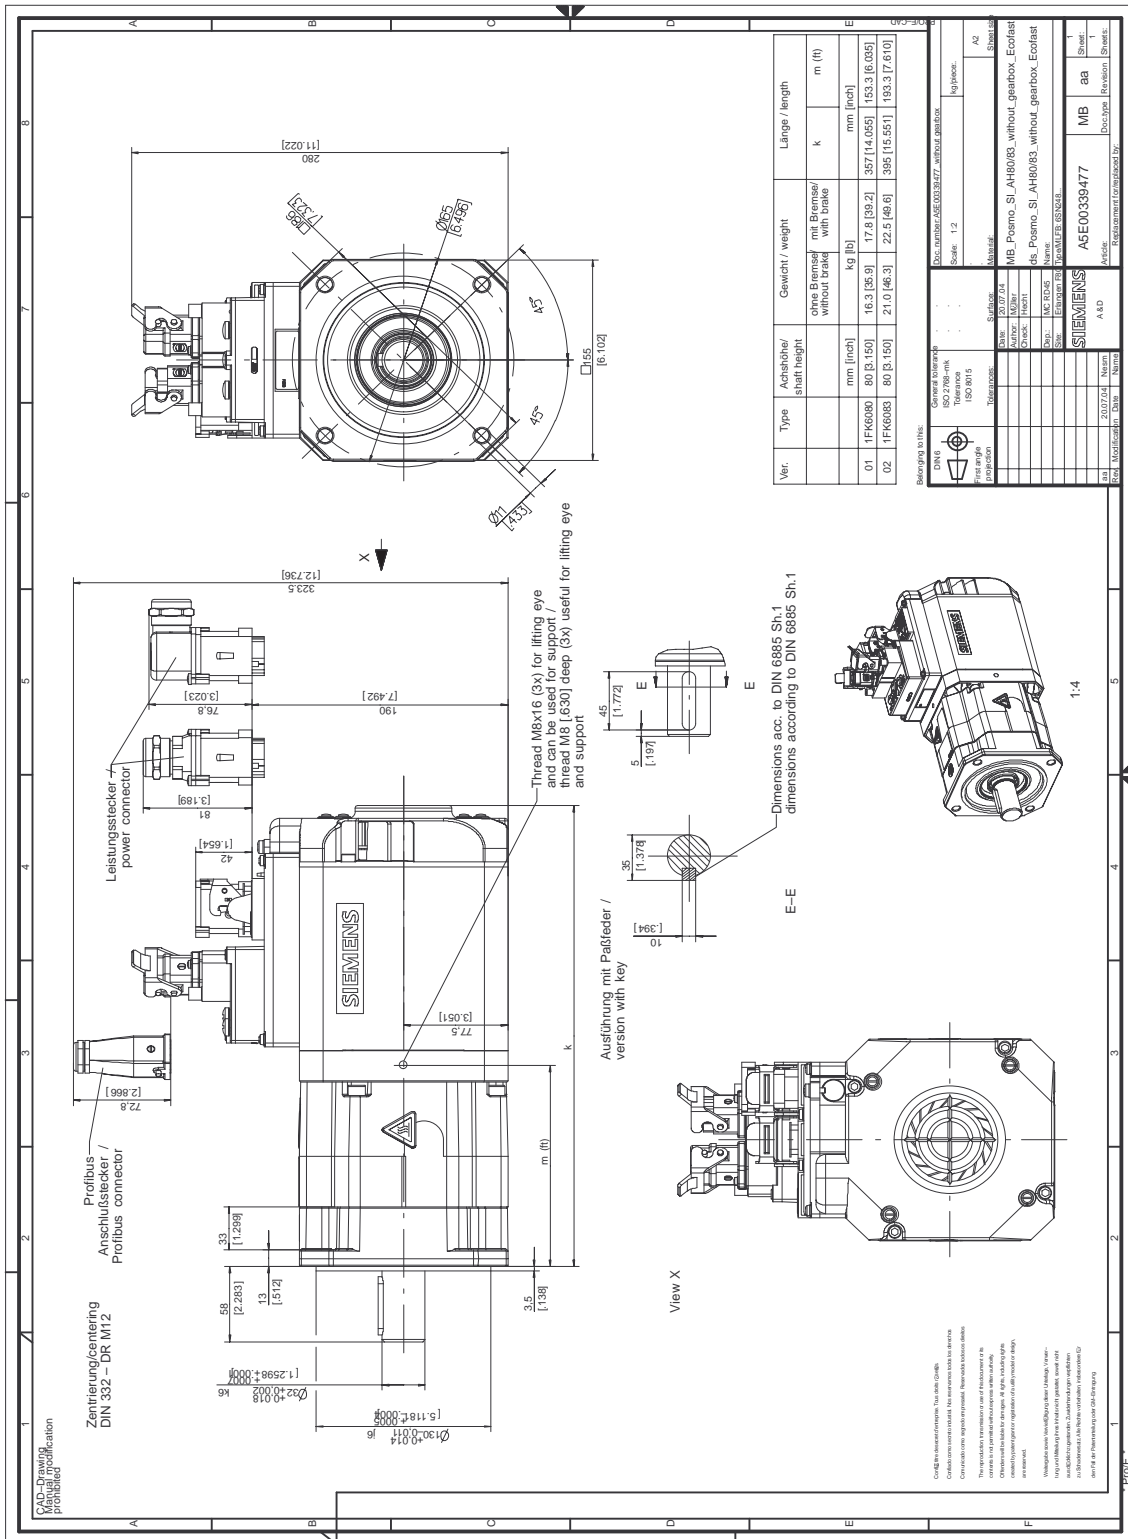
Dimension drawing POSMO SI 6SN248□-2CF□0-1G□□
